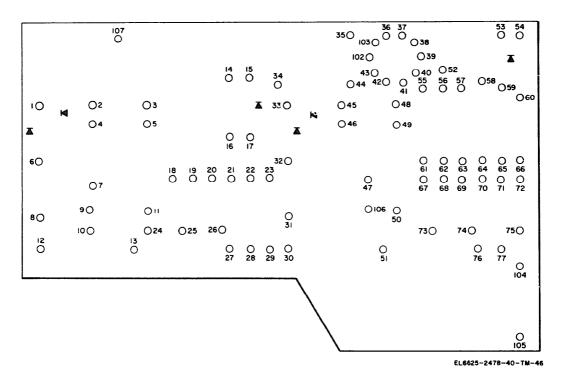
Component board assembly 1 A3A9A3, terminal location diagram.
